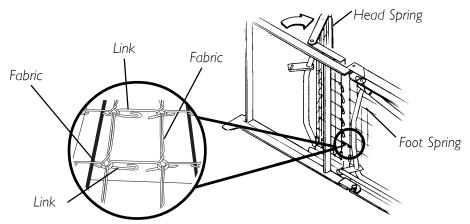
ASSEMBLING FOOT SPRING TO HEAD SPRING
